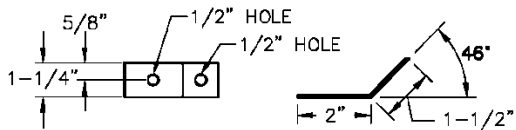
SURFACE MOUNT WALL INSTALLATION
